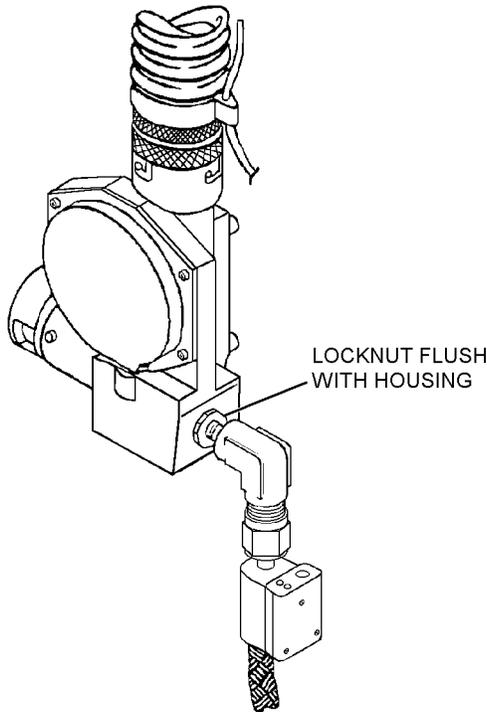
Assembly of Hoses, Regulator, and Straight Flared Adapter (P/N 1643340-1)
